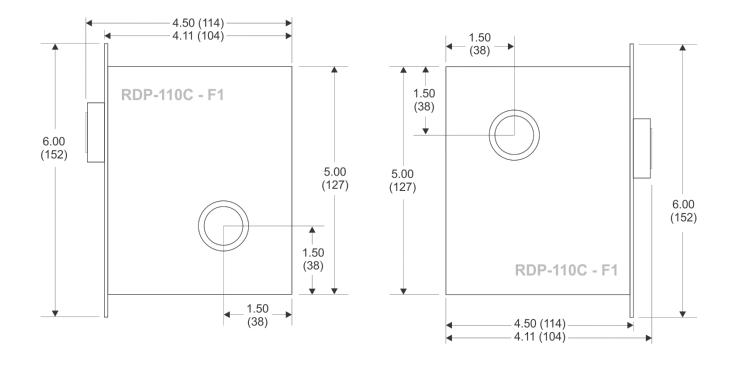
Mounting Dimensions, Rear, F1 and S1 Styles
